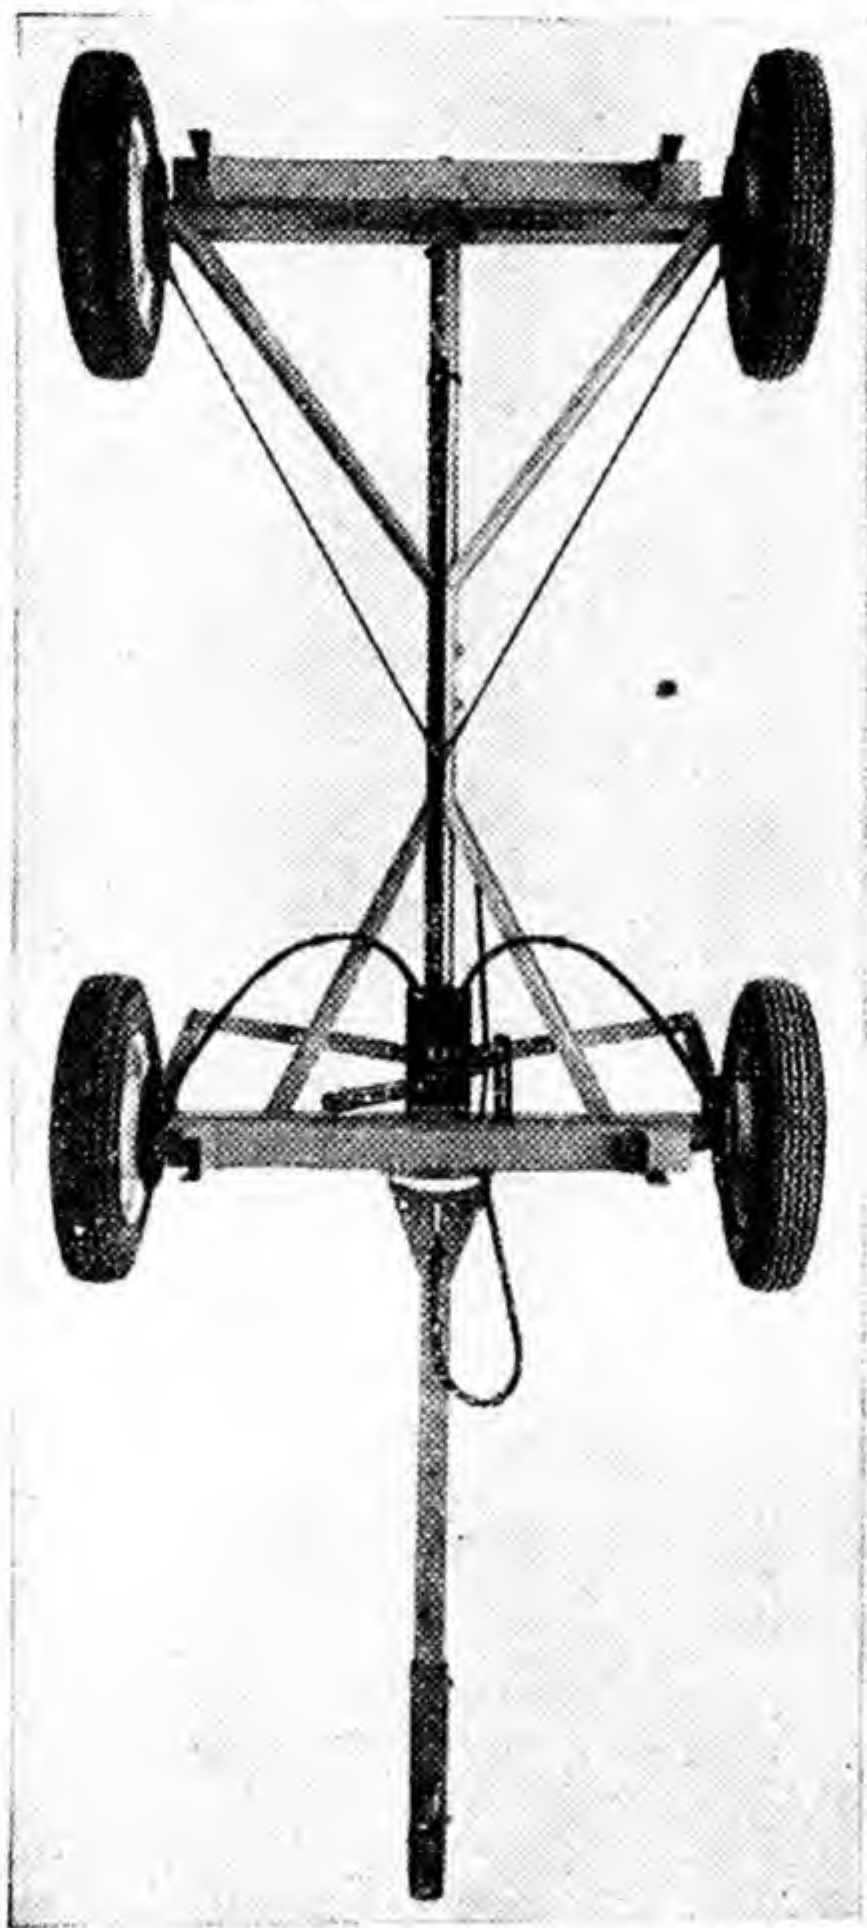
Farm-wagon truck trailer equipped with brake attachment.
